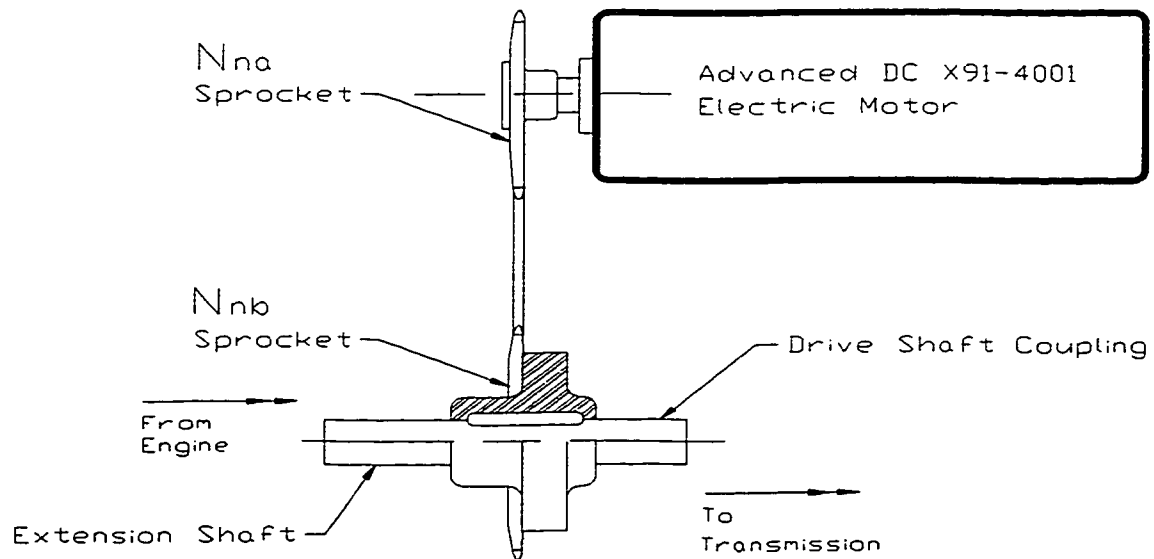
Electric Motor Sprocket Drive Schematic.
